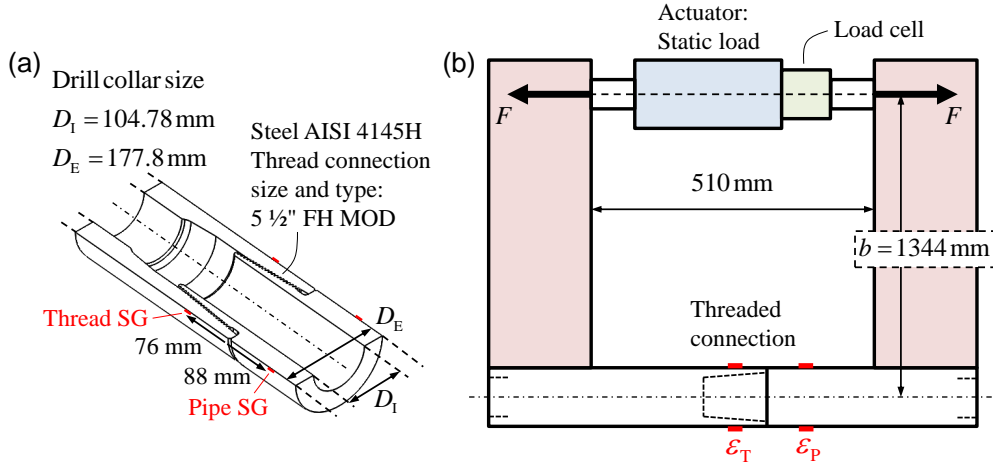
(a) Drill collar rotary shouldered connection dimensions and material. (b) Position of the strain gauges on the connection specimen and setup for the calibration procedure.
